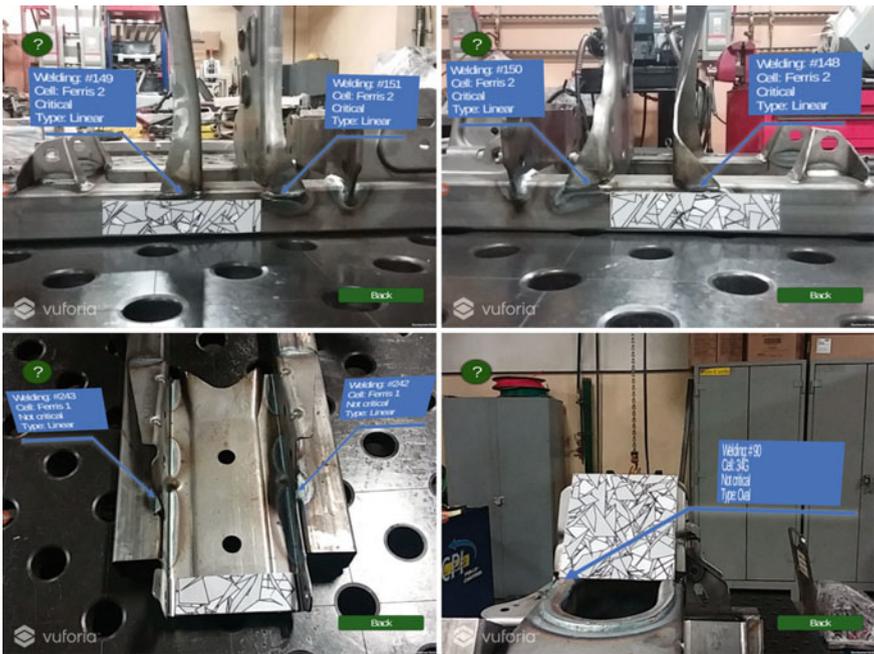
Example of the AR scenes for welding inspection
